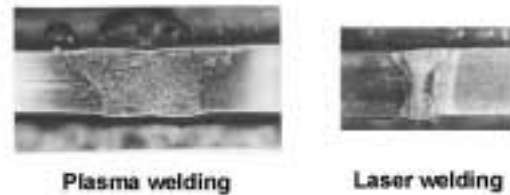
Sectional Distribution of Laser Welding and Plasma Welding
